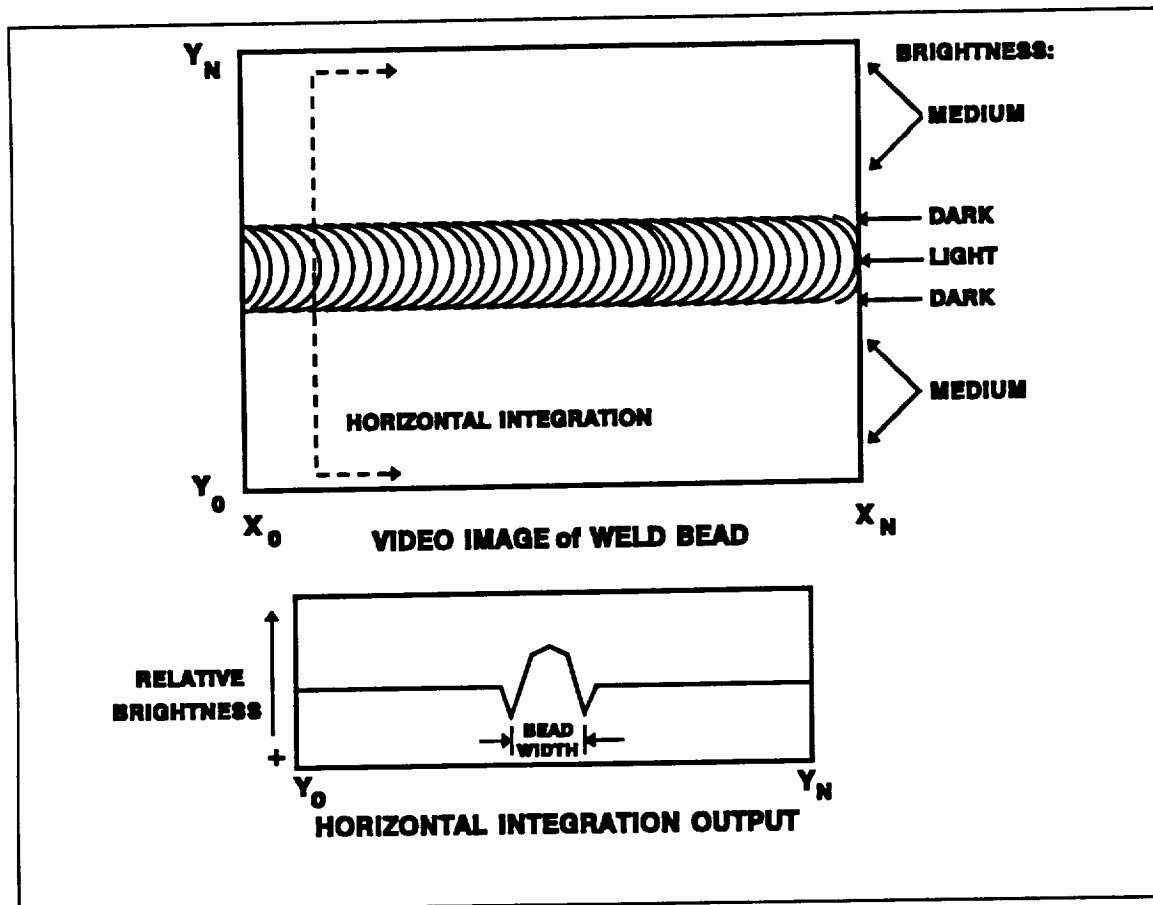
The horizontal integration procedure illustrated. This technique is used in analysis of GMA weld quality.
